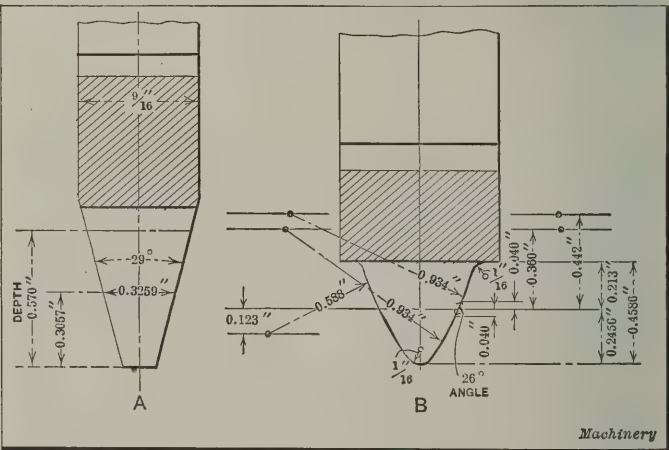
A, Cutter for Gear No. 2; B, Cutter for Gear No. 3
